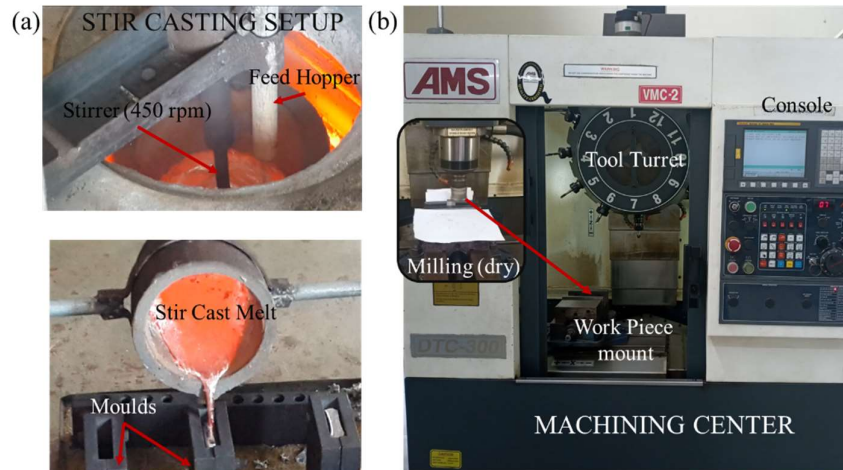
(a) Stir casting setup for fabrication, (b) machining center setup for face milling.
